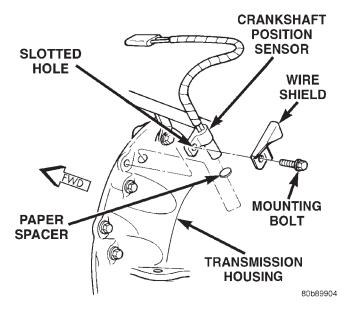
CKP Sensor—4.0L 6-Cylinder Engine
